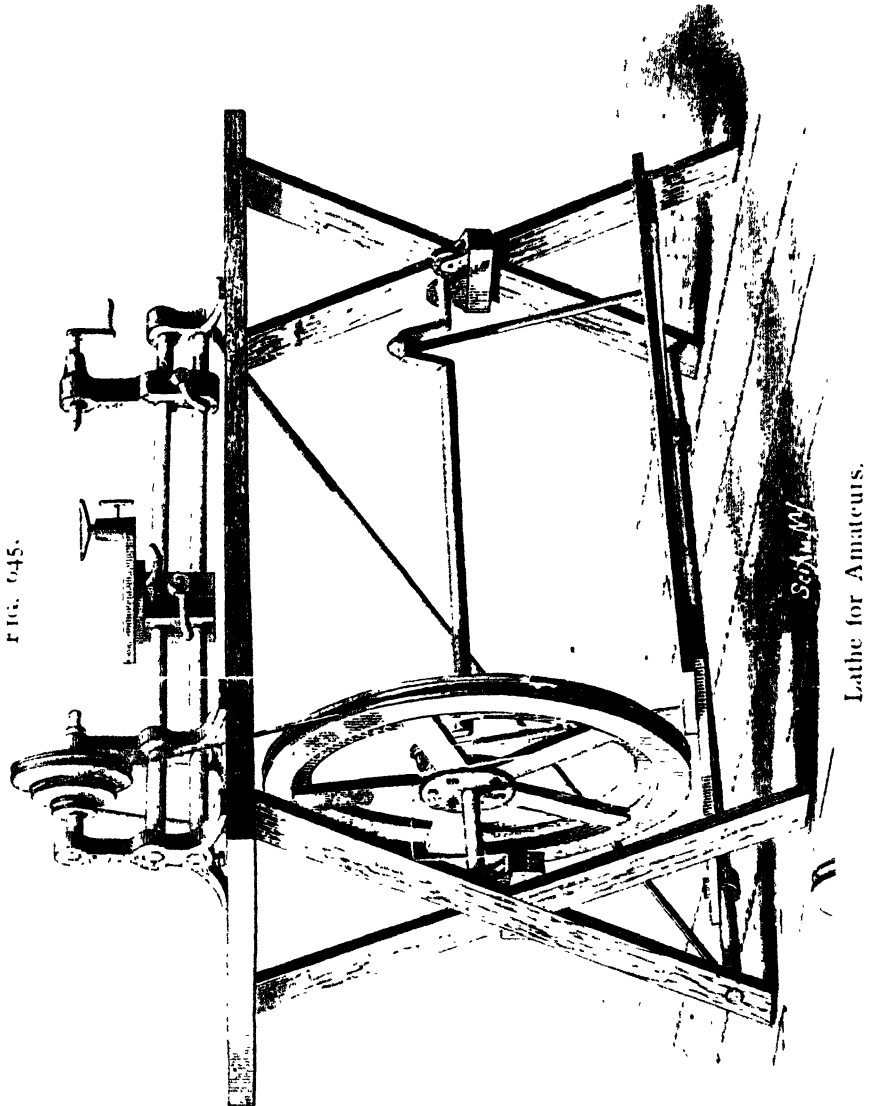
represents in perspective the lathe complete. Fig. 646 is a perspective view of the lathe without the table. Fig. 647 is a vertical longitudinal section of the lathe, showing the manner of securing the head and tail stocks to the bars which form the bed.
